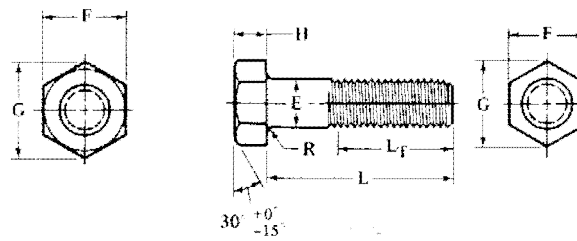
Hex Bolts, Heavy Hex Bolts (Table 3)
